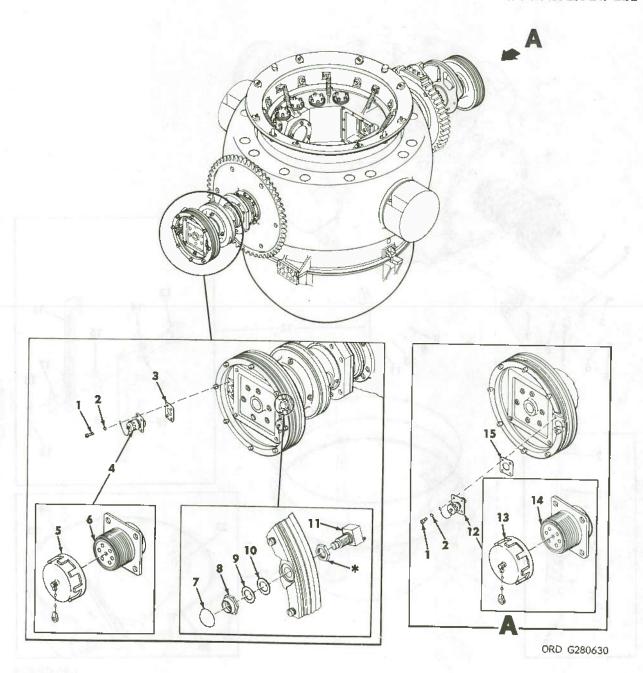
COVER /8173504/-EXPLODED VIEW /SEE FIGURE 176 FOR NEXT HIGHER ASSEMBLY/
